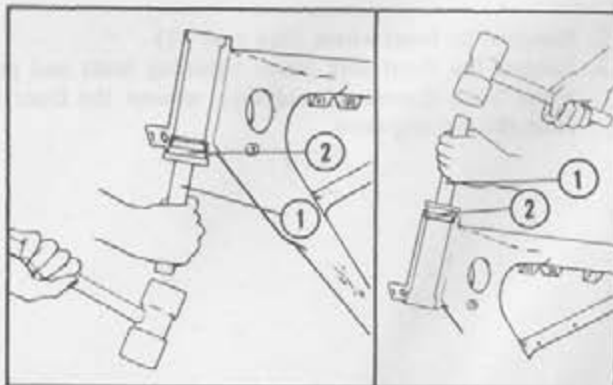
(1) Ball race driver (2) Race driver attachment
